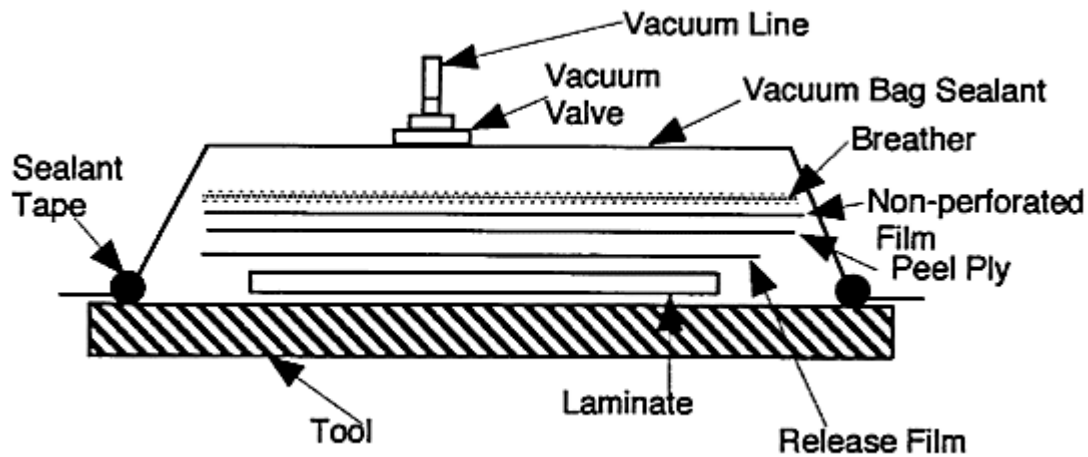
Composite Manufacturing using Vacuum Bagging [29]
